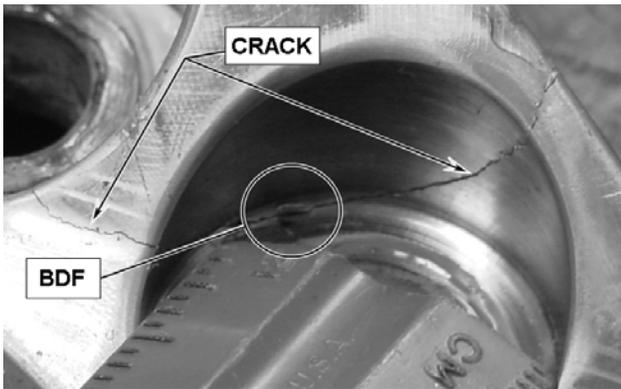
Rotating Scissors Bracket Flaw and Fatigue Cracking.
